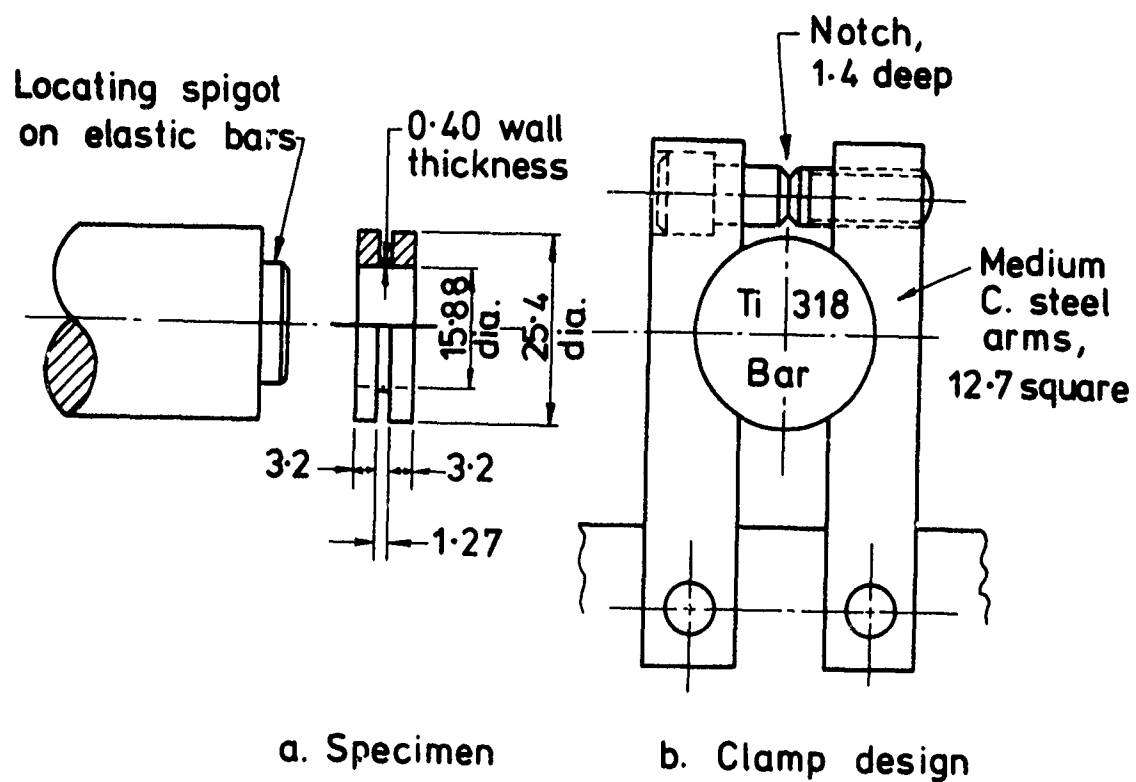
Specimen and clamp designs - all dimensions in mm.
